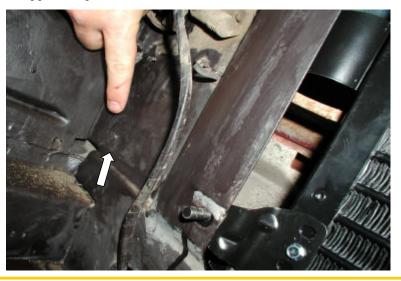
Lower radiator support dimple location "Use a brand new hole saw and drill a 1/8 inch pilot hole before you start cutting with the hole saw.
